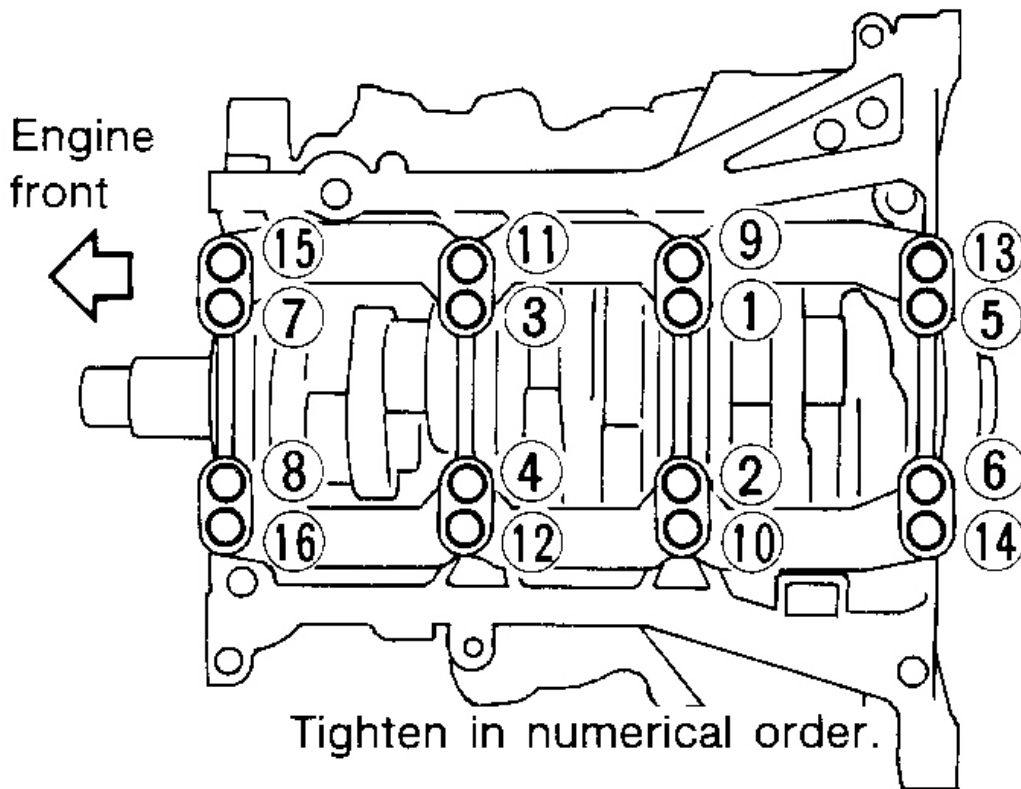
Identifying Main Bearing Cap Bolts Marks
